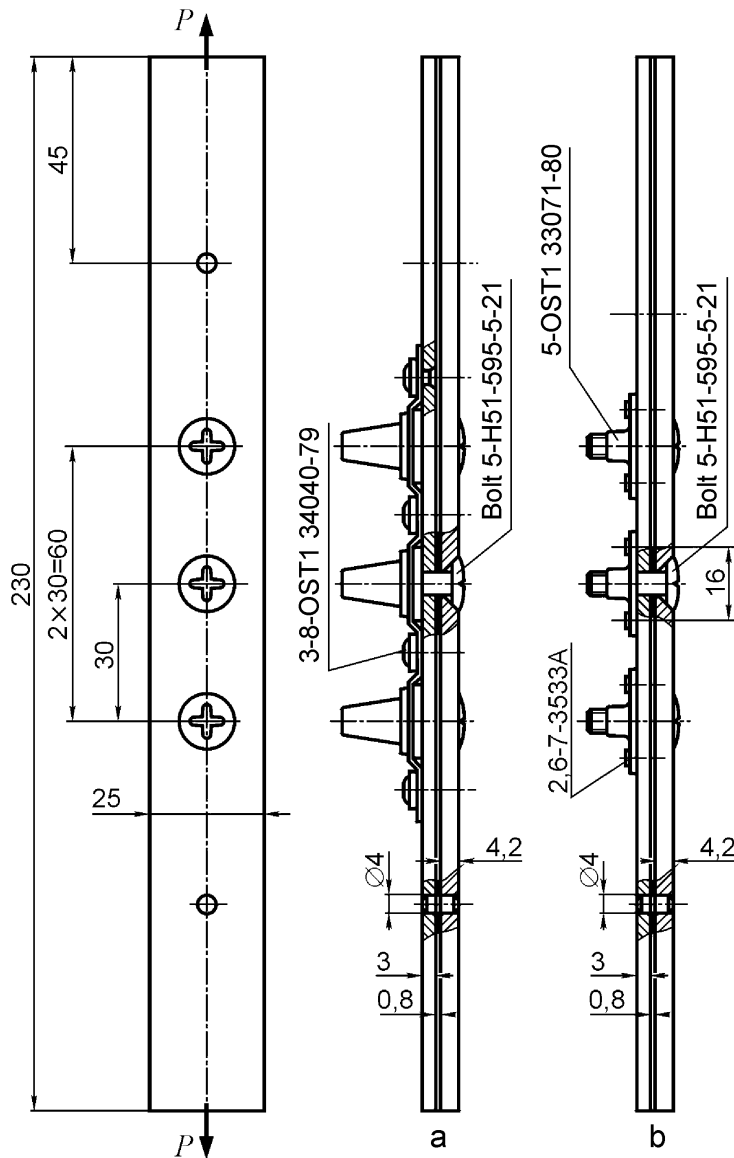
Longitudinal Not Loaded For Shear Joint Test Piece: a – nut-to-section attachment; b – double-ear self-locking nuts setting
